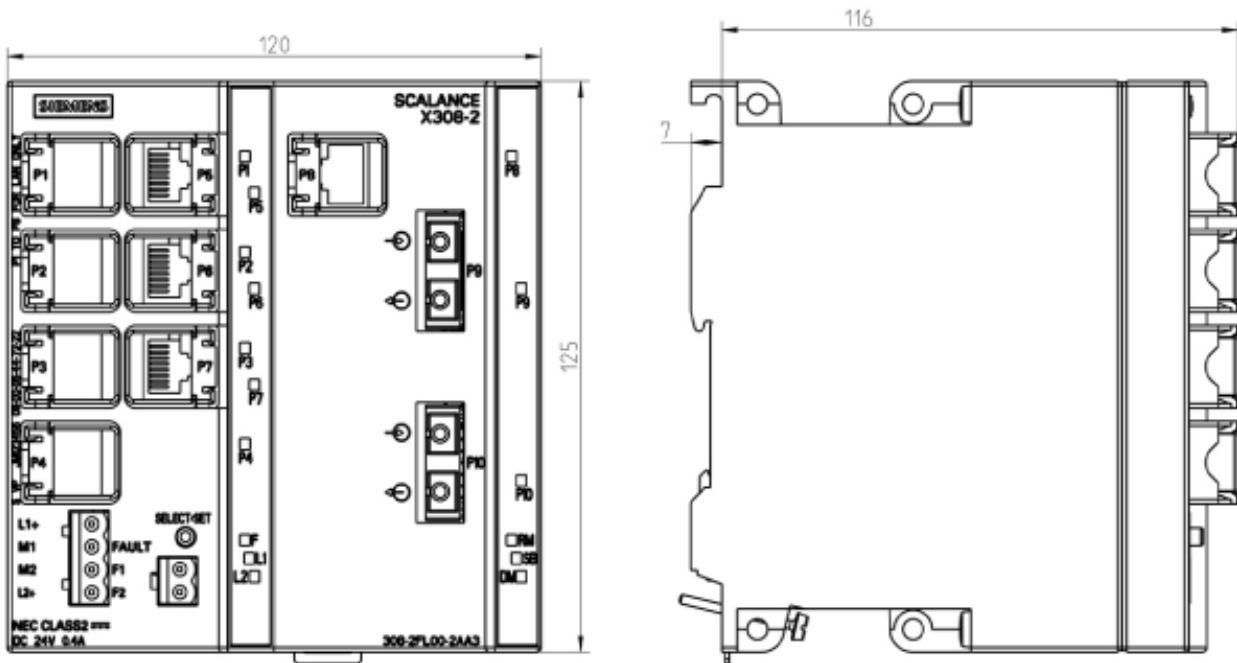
Medium design dimension drawing (example used here SCALANCE X308-2)
